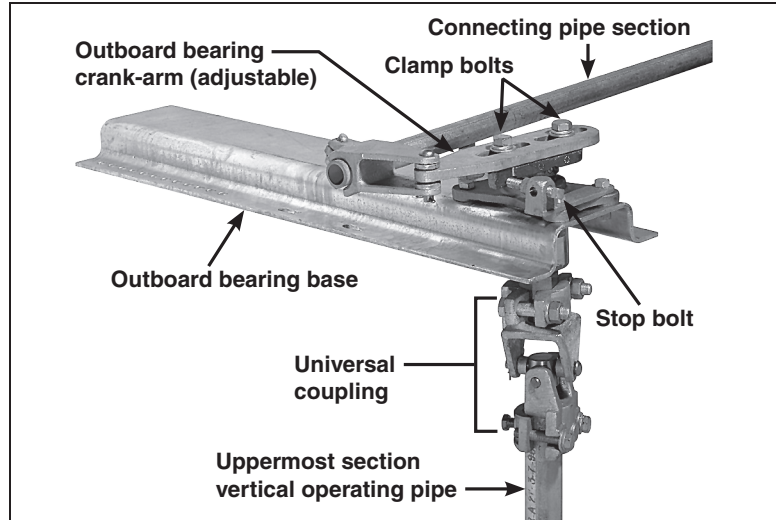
Attach the universal coupling to the switch pole rotating shaft. Typical outboard bearing configuration, upright mounted switch poles.
